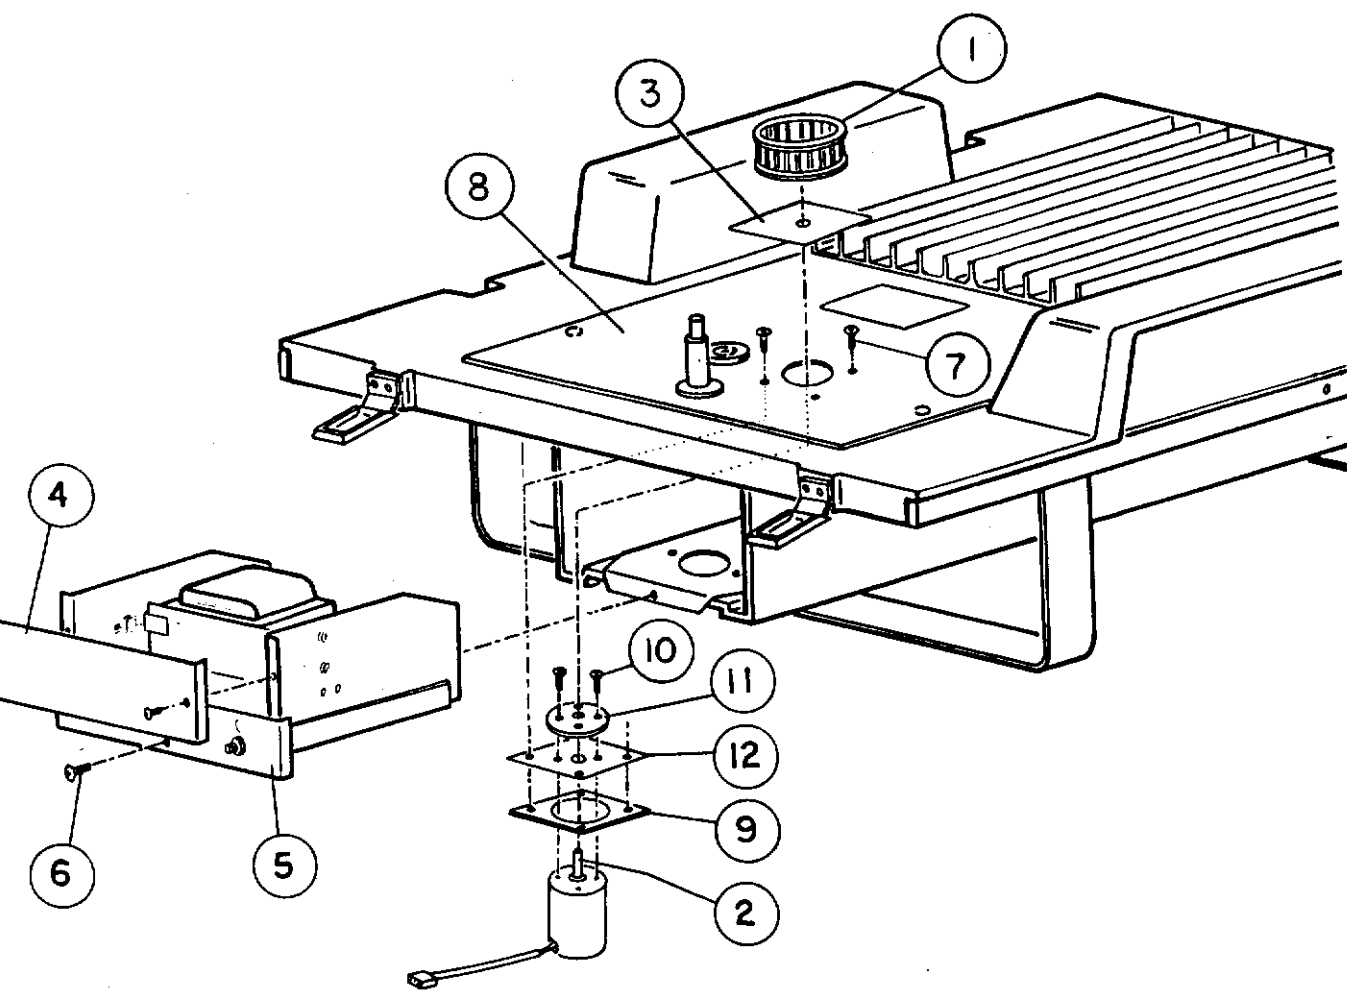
REMOVAL OF CYLINDRICAL MOTOR ASSEMBLY
